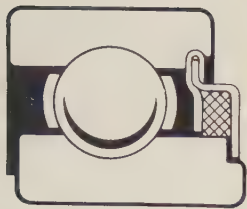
Felt Rubbing-Type Seal: This is a general purpose seal which meets the requirements of most applications. A felt ring is positioned by two fixed metal members and sealing is accomplished by rubbing contact of the felt washer bore with the smoothly ground OD surface of the bearing inner ring. Control of felt washer dimensions can provide for tight fitting contact for efficient sealing or loose fitting contact for low torque or high-speed operation.
